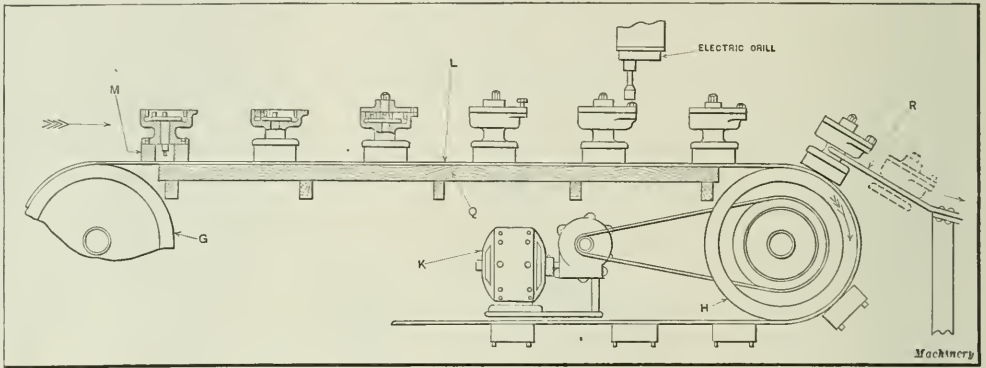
Motor-driven Belt Conveyor used in assembling the Triple Gear Unit shown in Fig. 5
